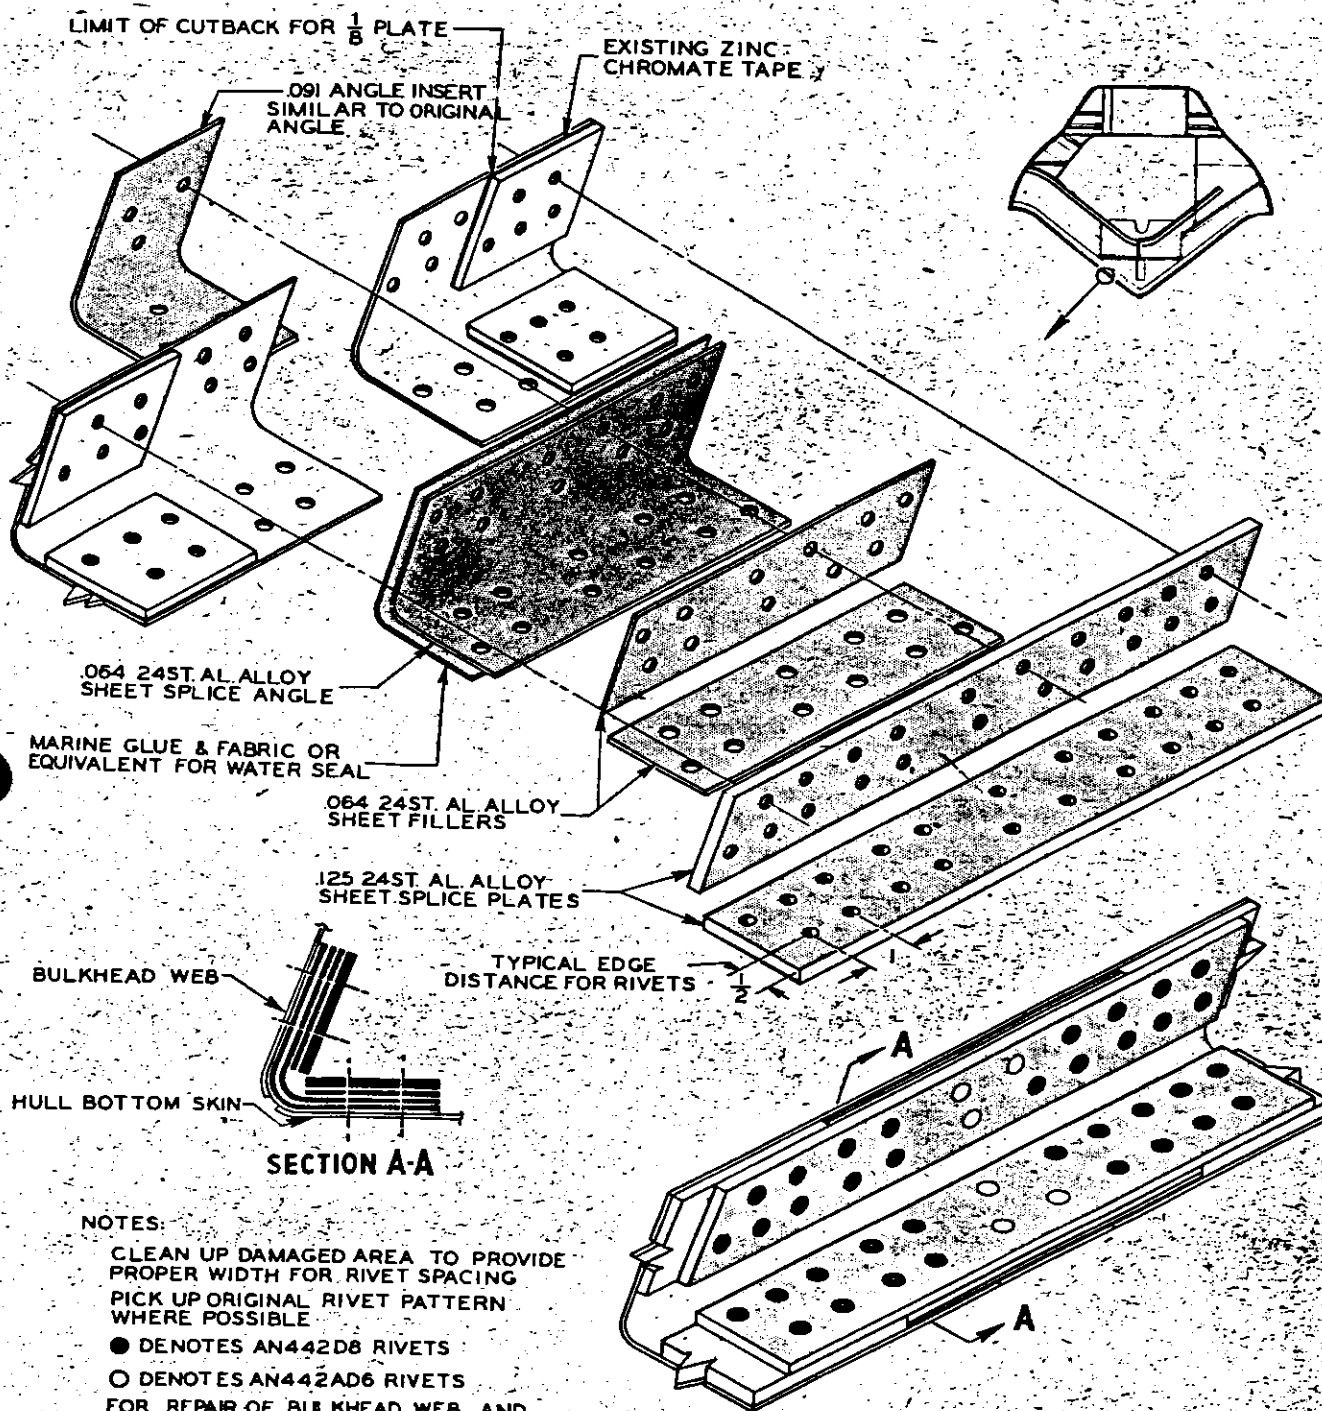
(Sheet 2 of 2 Sheets)—Bulkhead 1 Repairs
